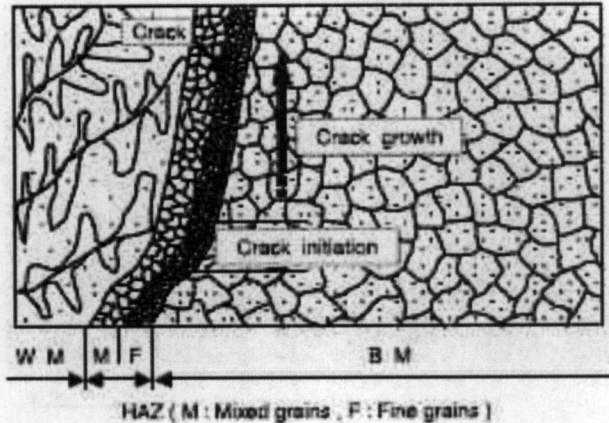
Schematic of Type IV crack growth in fractured P91 weldment [Watanabe 2006].
